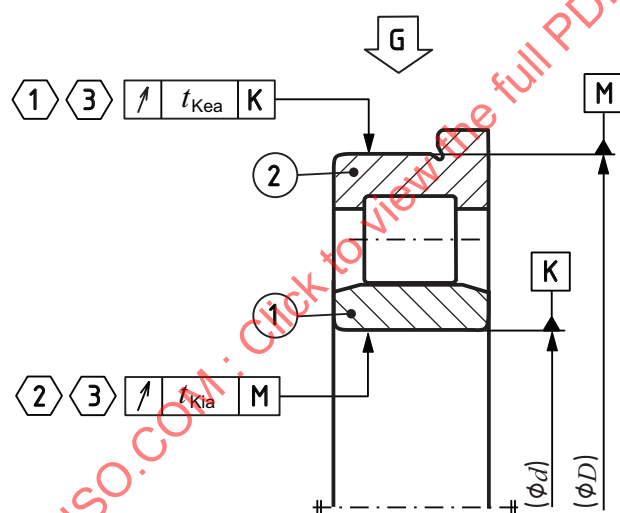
Geometrical tolerances for single components for bearing with flanged outer ring
